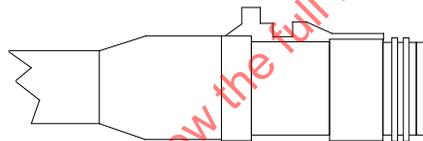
TYPICAL FINISHED ASSEMBLY
